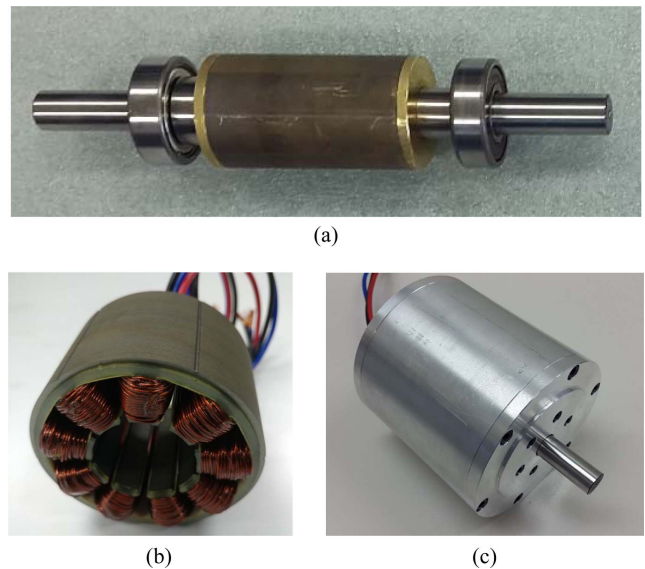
(Color online) Manufactured inner rotor, stator and total assembly. (a) inner rotor, (b) stator, (c) HSM.
